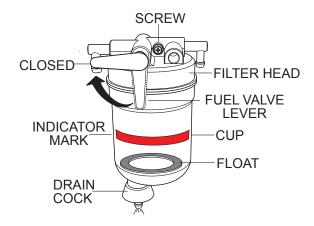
Fuel Filter/Water Separator Cleaning The Fuel Water Separator
